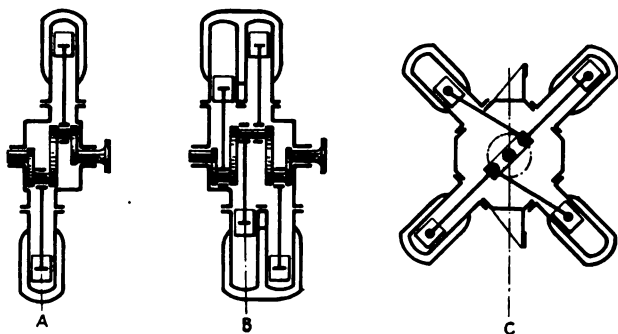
Two-cylinder horizontal-opposed Darracq engine.
